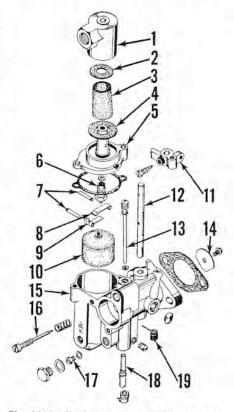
Exploded view of Tillotson carburetor of the type used on most models.
